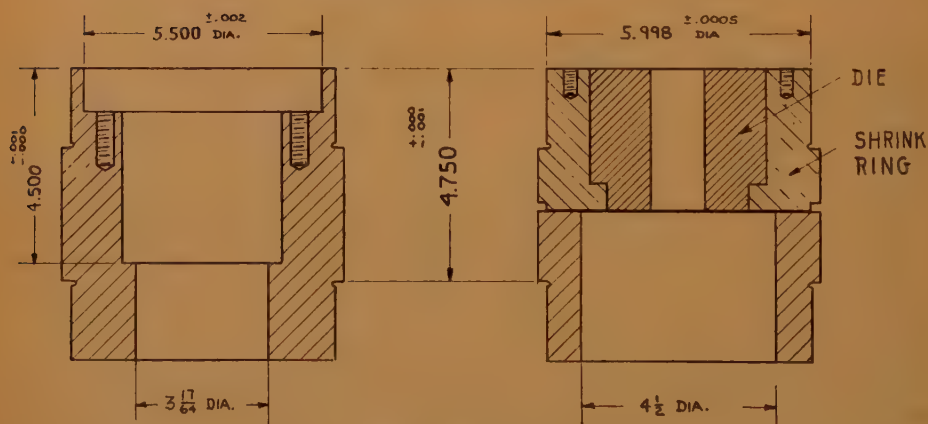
DIE HOLDER, DIE AND ADAPTER.
